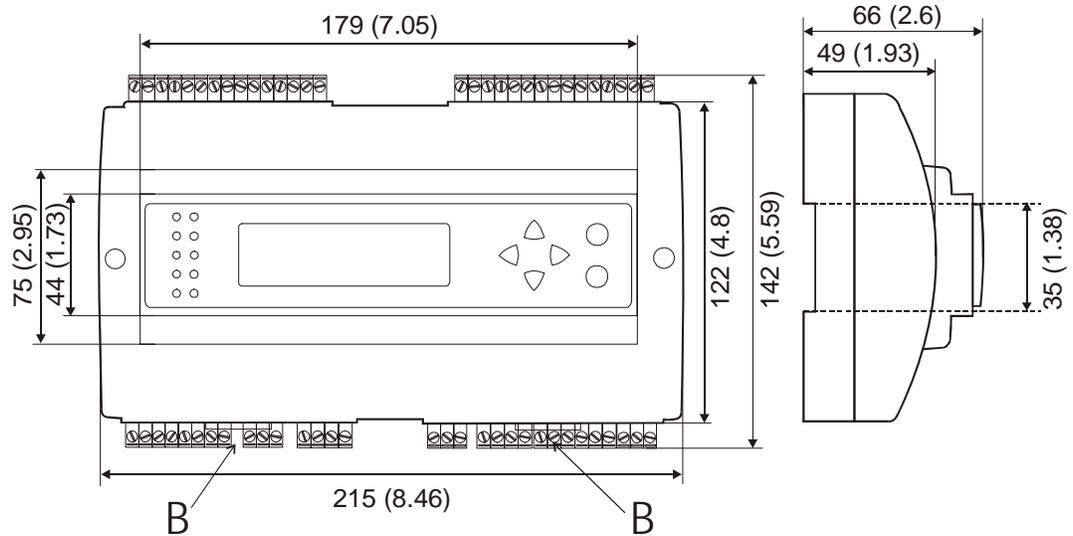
Mounting Dimensions for FX16 (Shown with Integral User Display and Screw Connectors), mm (in.)
